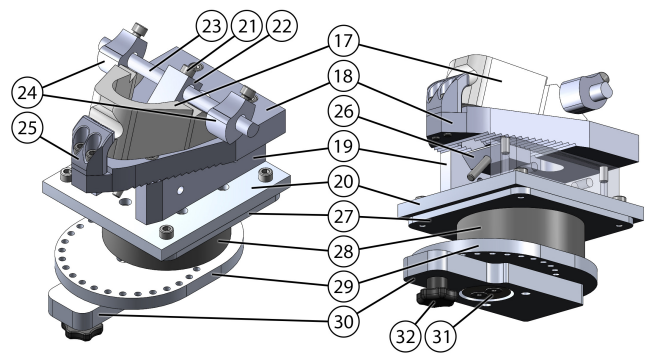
Holding device for lower jaw: (17) lower jaw, (18) surface plate, (19) supporting plate, (20) ground plate, (21) clamping bolt, (22) sliding block, (23) clamp axis, (24) side blocks, (25) front block, (26) clamping nut, (27) top plate of sensor build-up, (28) force-torque sensor, (29) rotation plate, (30) bottom plate, (31) rotation axis, (32) locking bolt
